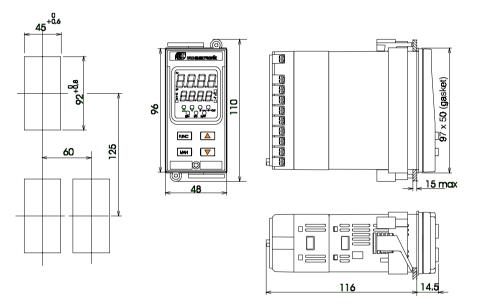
A TFS - OUTLINE AND CUT-OUT DIMENSIONS
